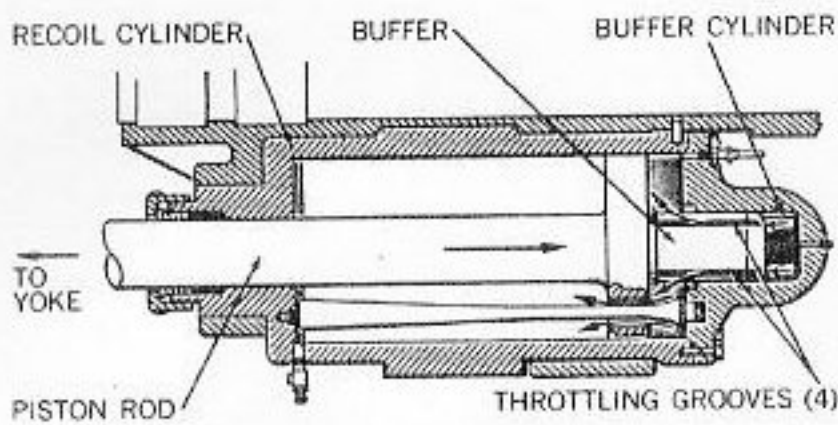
D. 16-inch Gun Assemblies, Recoil Buffering Action During Counterrecoil.
